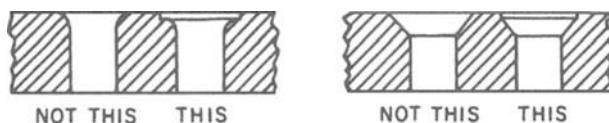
Whenever possible, chamfering should be used on open holes, because it reduces or eliminates the potential for rough molded corners, cracks, and the like.
